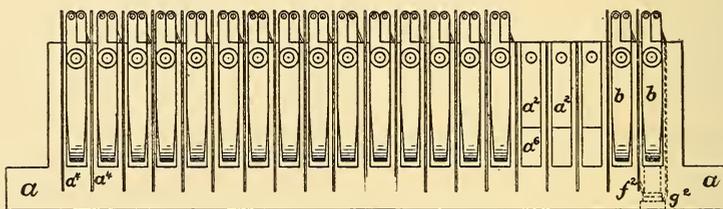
BOTTOM VIEW OF MULTIPLE JACK STRIP.
